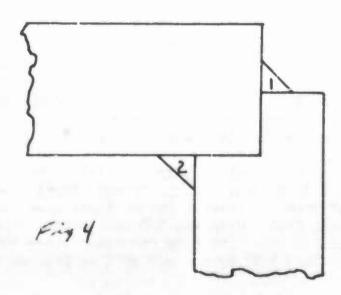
Cross Sectional View of a Typical Rebated Joint.
